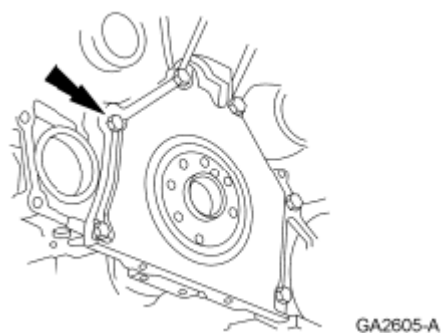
Locating Crankshaft Rear Seal Retainer Plate And Bolts
